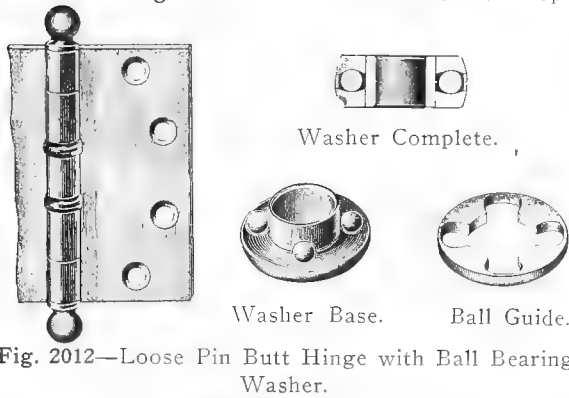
Loose Pin Butt Hinge with Ball Bearing Washer. Adams & Westlake Company.
